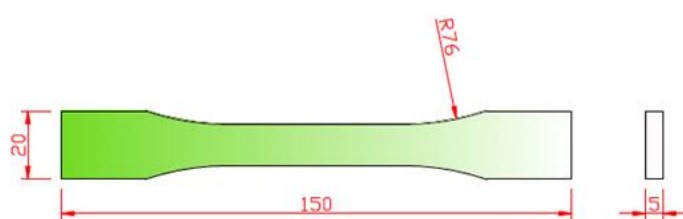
Dimension of welded sample for tensile strength test.
